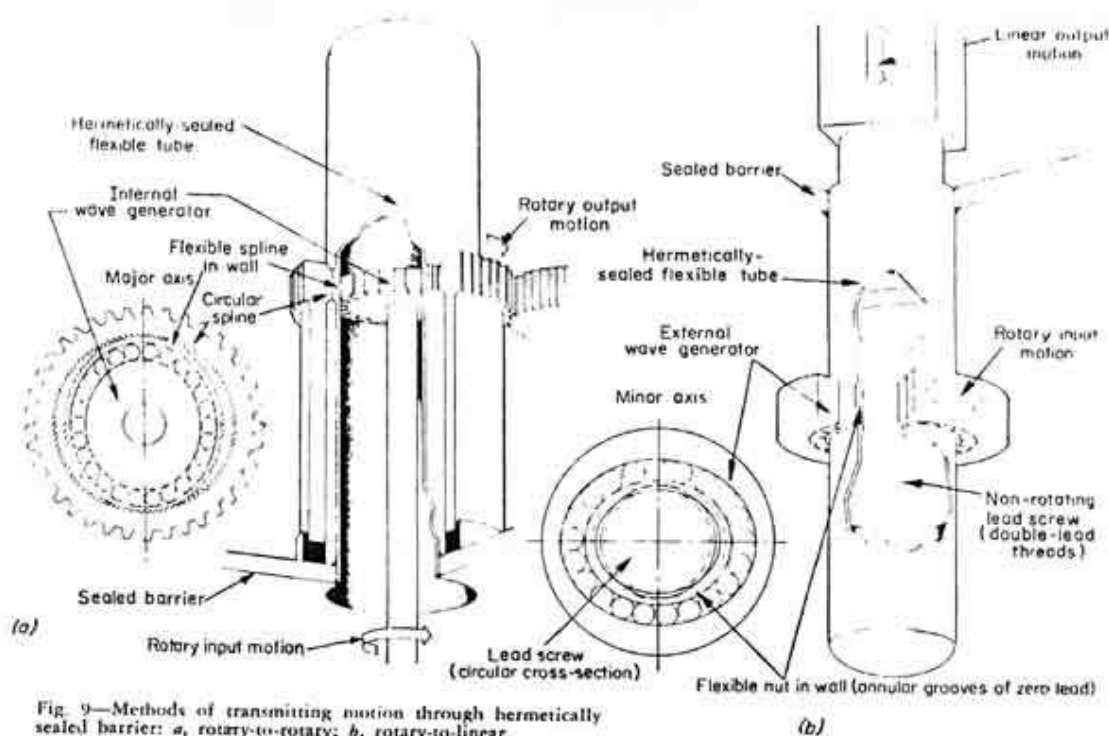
Methods of transmitting motion through hermetically sealed barrier: *a*, rotary-to-rotary; *b*, rotary-to-linear.
